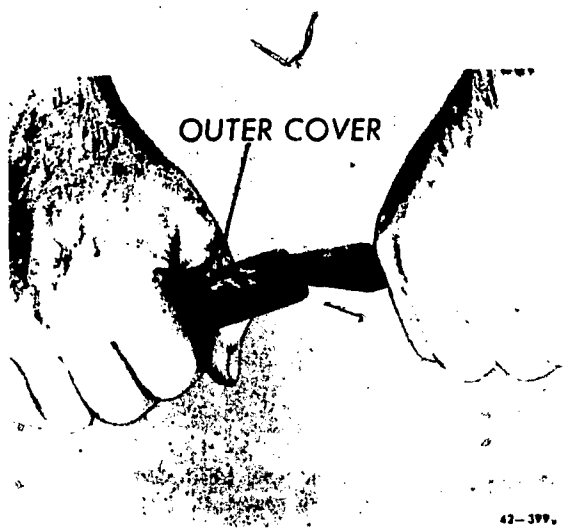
Twisting outer cover off high-pressure hose (MIL-H-8788).
